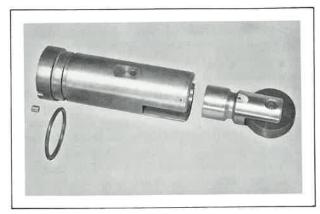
VALVE CROSSHEAD AND GUIDE ASSEMBLY.
